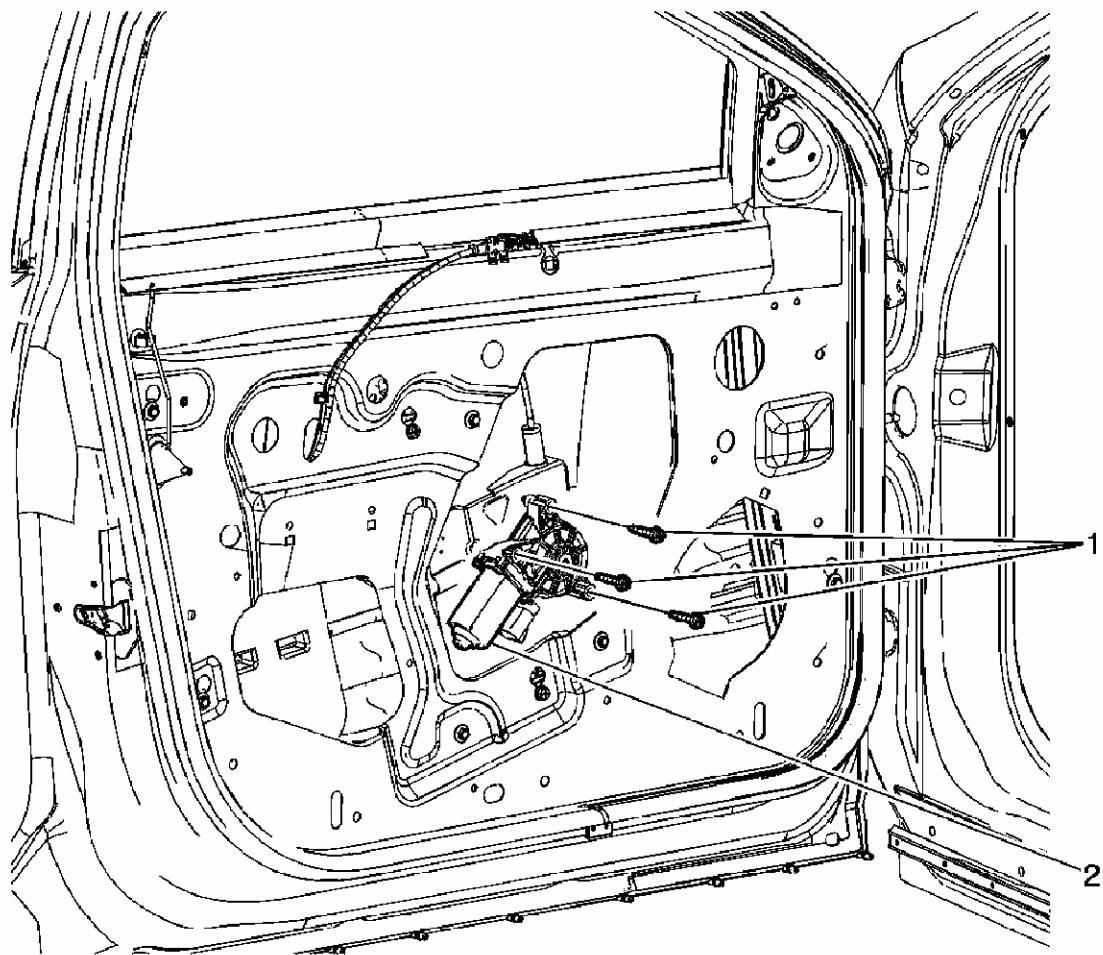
Locating Front Side Door Window Regulator Motor Bolts
